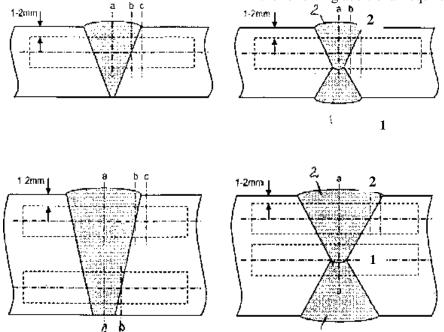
The diagram of cut-out and location of the cut in the impact test assembly with the approval of welding procedures with the heat input of up to 50 kJ/cm inclusive:
